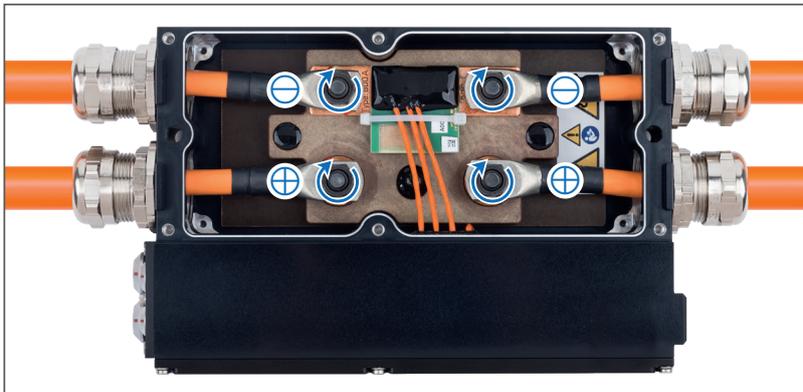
HV BM 1.2, housing opened, HV cable mounted
